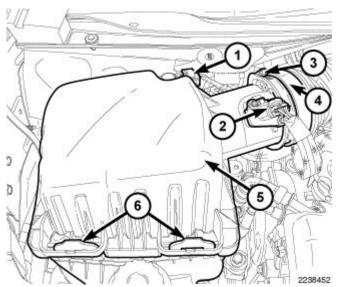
Intake Air Housing Courtesy of CHRYSLER LLC
